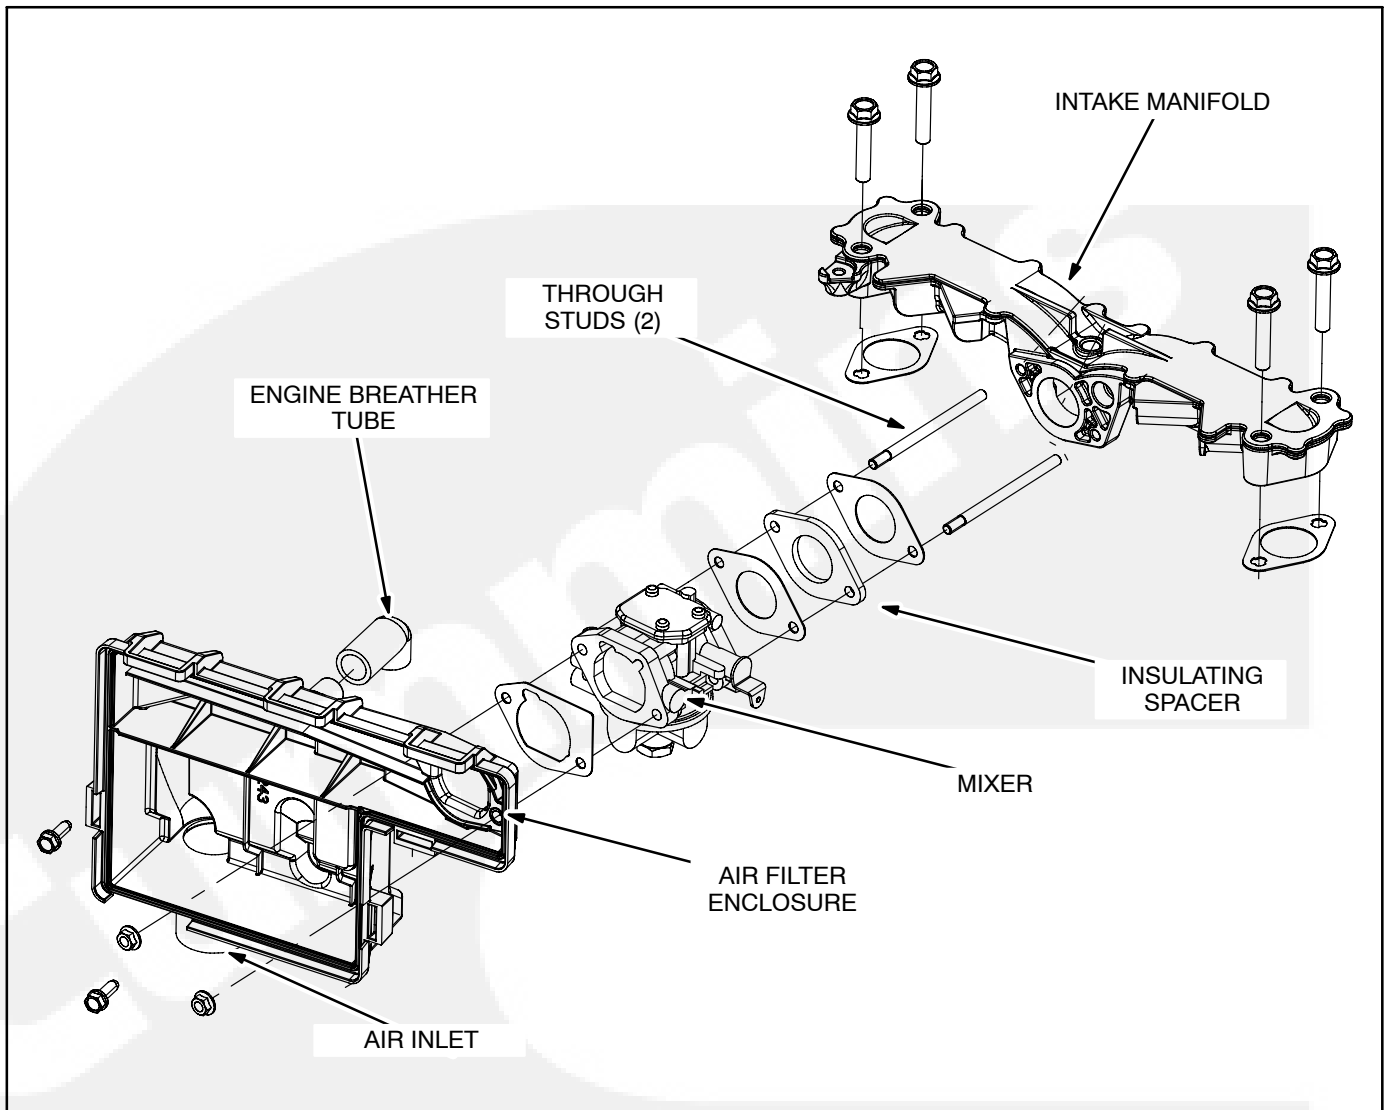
LPG MIXER AND INTAKE ASSEMBLY
